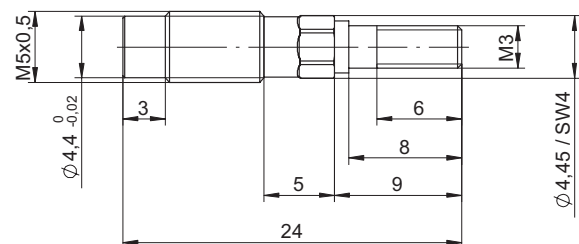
Dummy Type 6405A2 with excerpt thread M3
